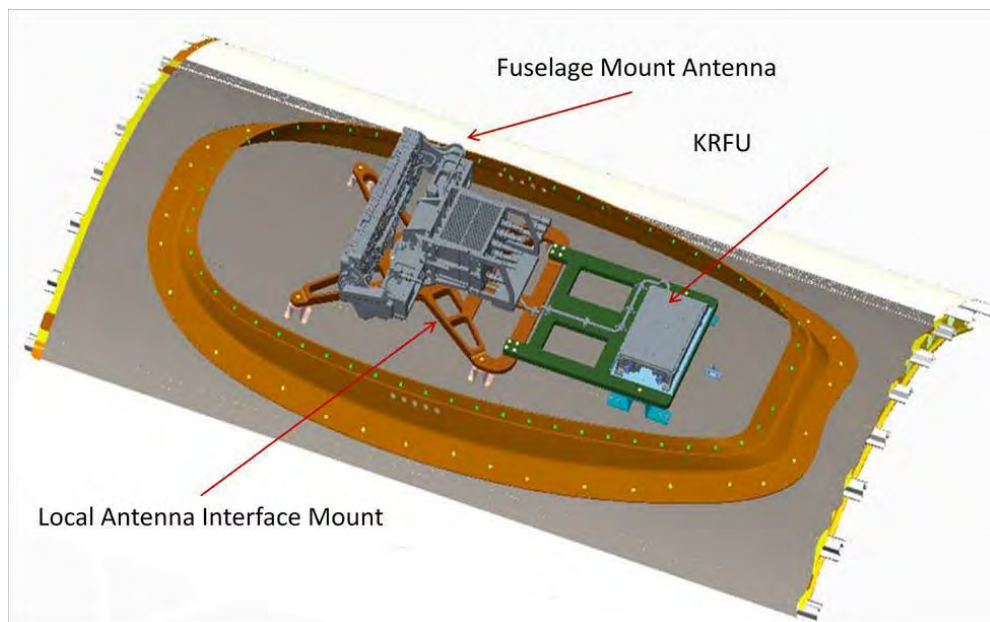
LAIM Assembly with FMA and KRFU Placement on Aircraft
